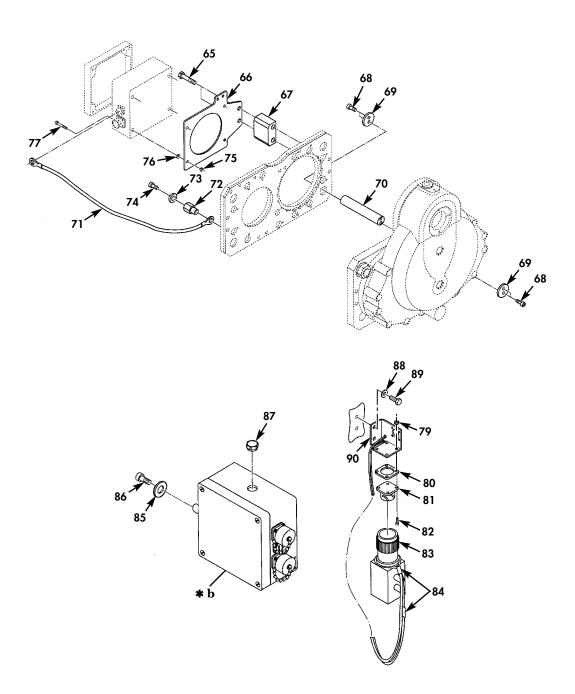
Winch Assembly and Related Parts (Sheet 3 of 5).
